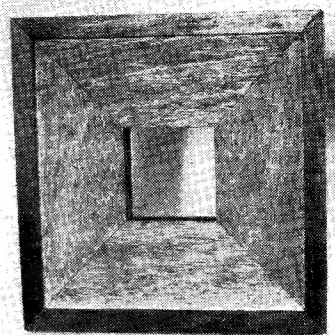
A 6 in., mitred frame machined in the jig-saw
